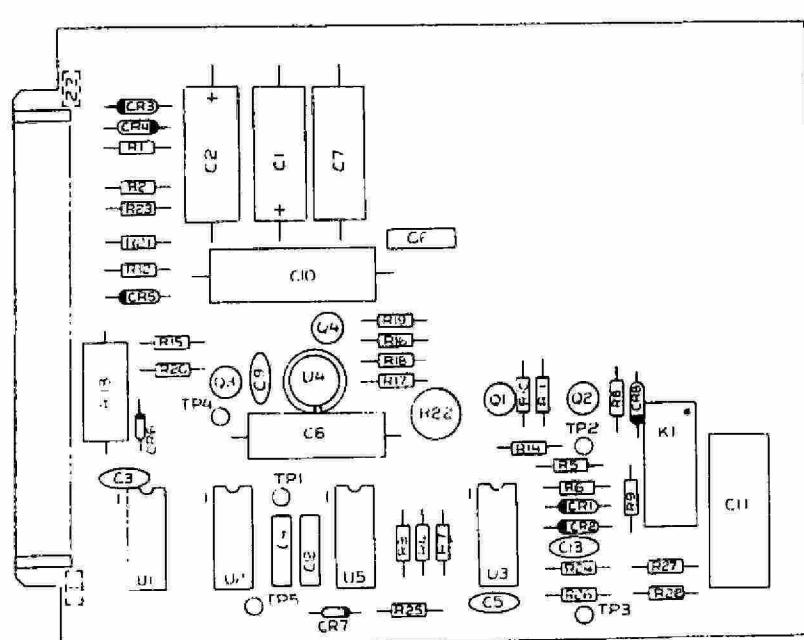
AUTOSHIM COMPONENT LAYOUT
